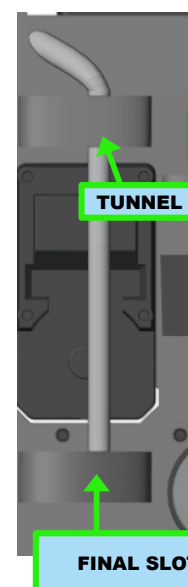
Inserting the tube into the pass-through tunnel and then into the final slot (rear view)
